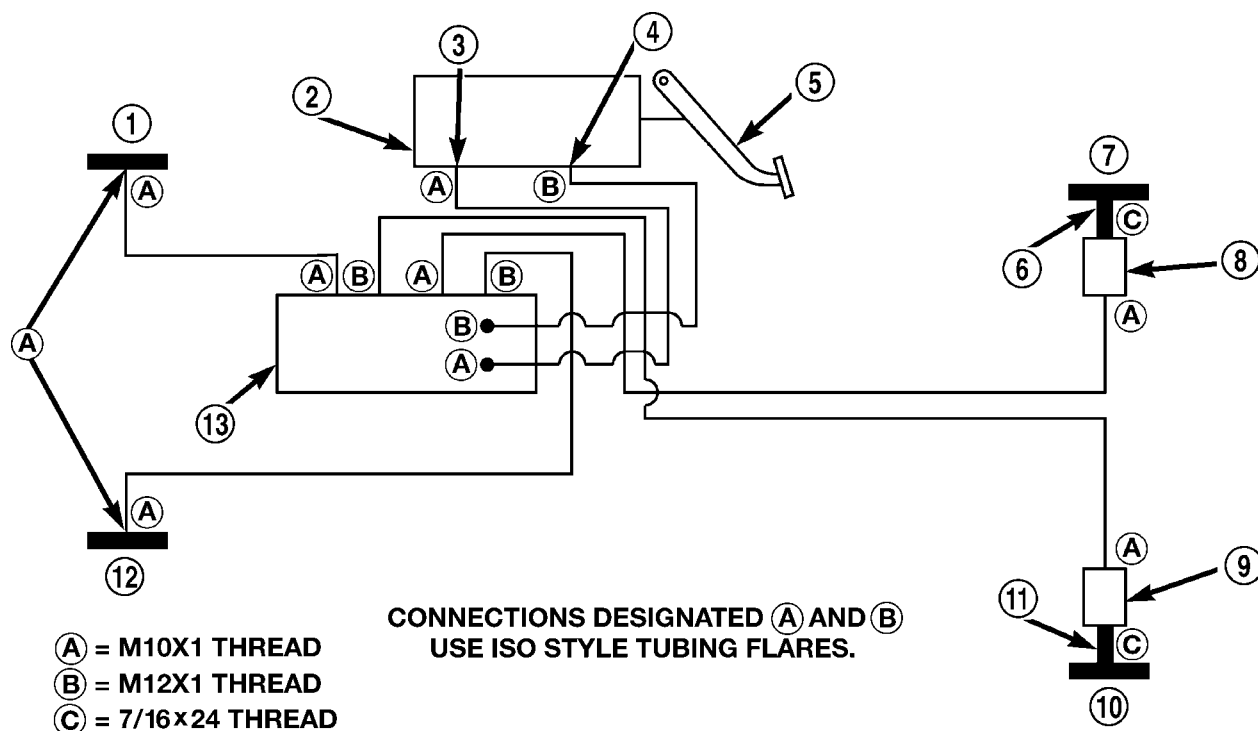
Brake Tube Nut Thread Sizes And Tube Routing
